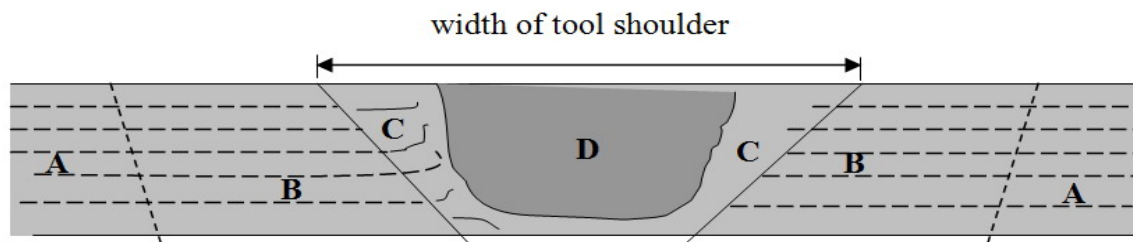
Schematic diagram of entire friction stir welding.
